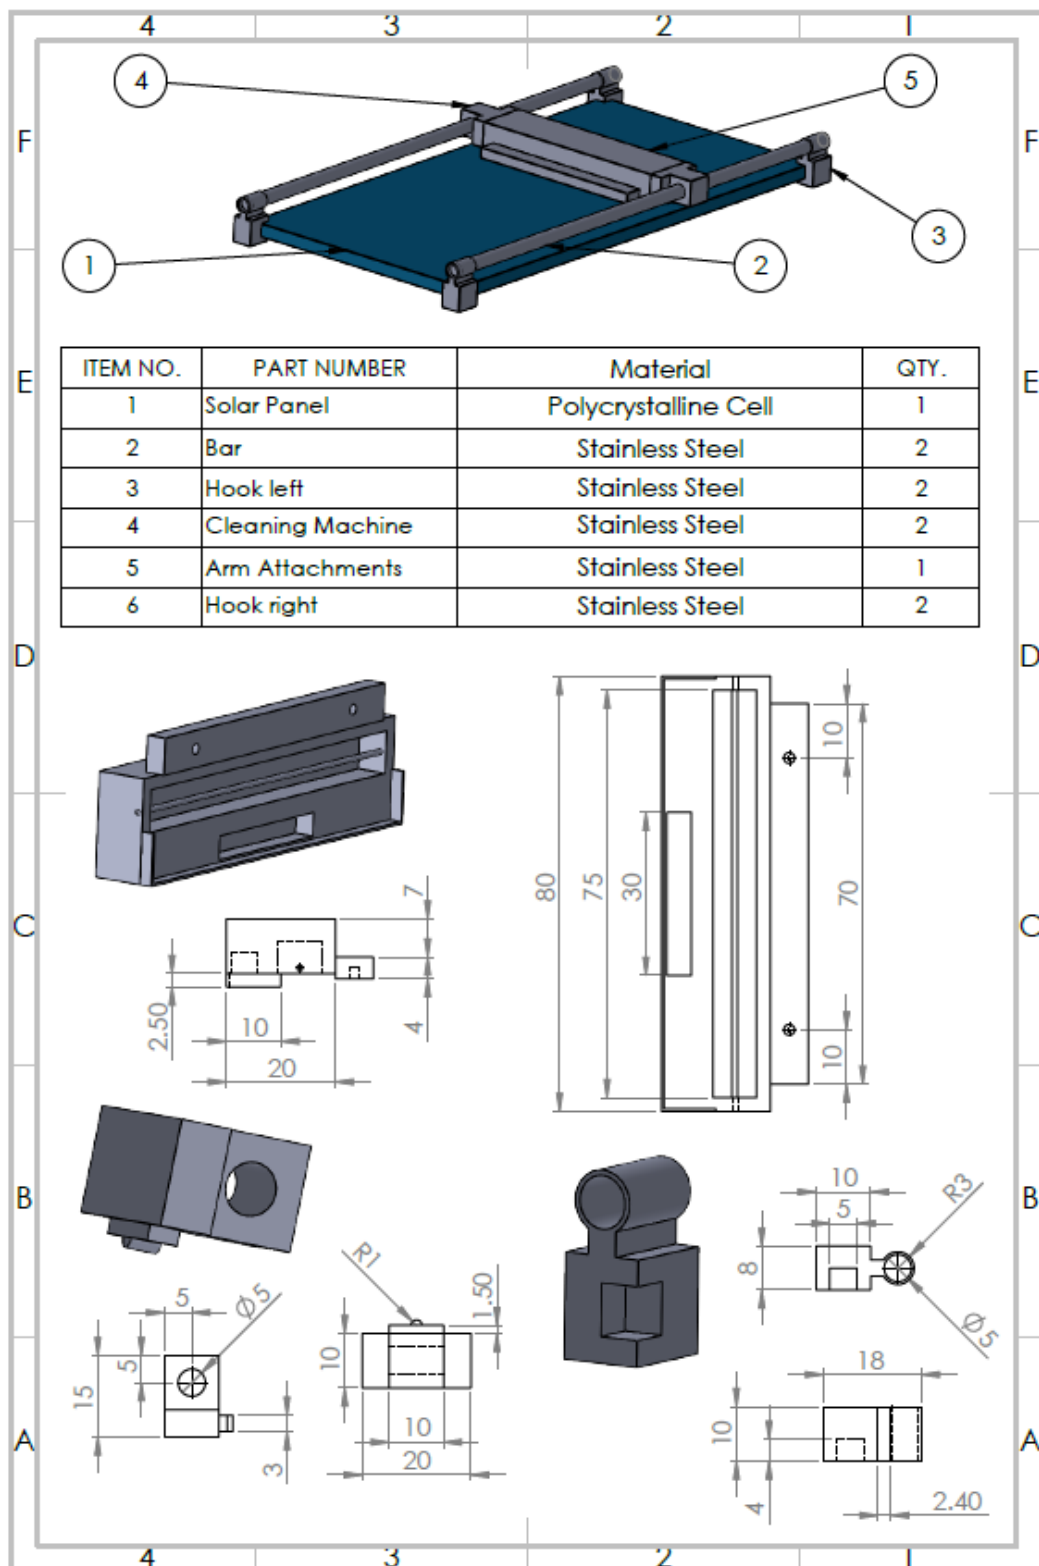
Engineering Drawing for Design 2 (Wet & Dry)
